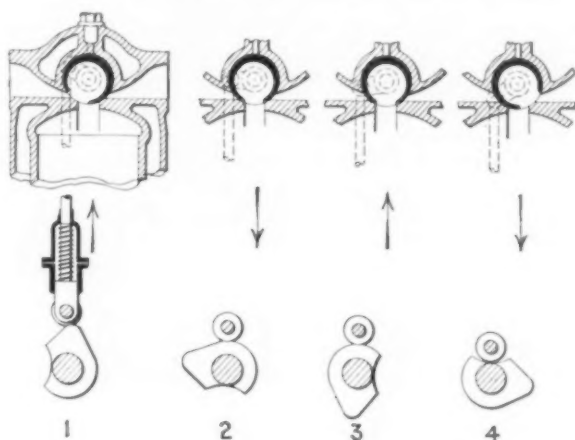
DUBOIS-ROUSSEAU SLIDE VALVE GEAR
